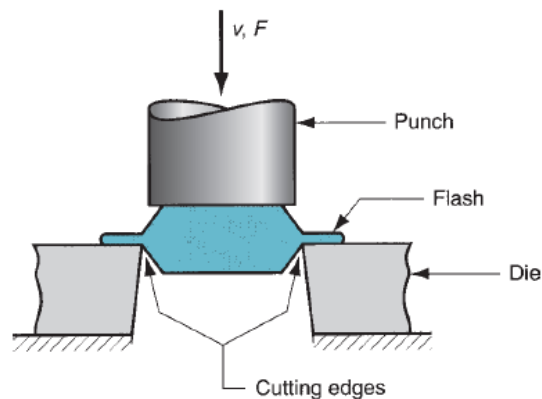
Trimming operation (shearing process) to remove the flash after impression-die forging.
